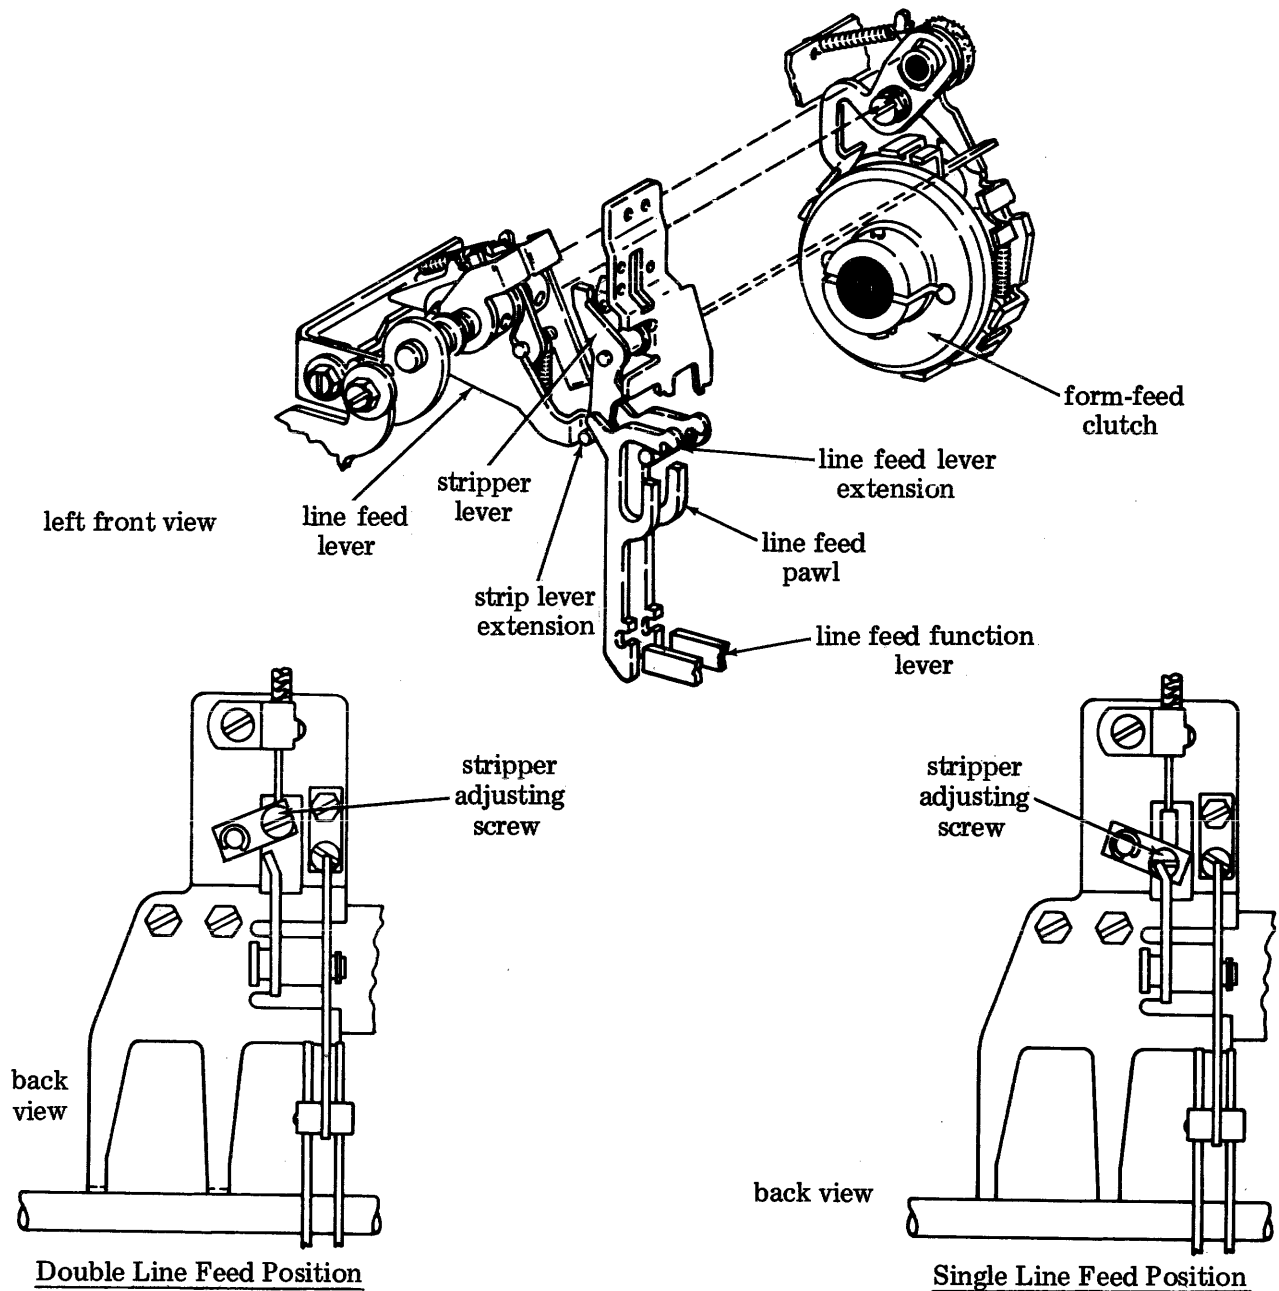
Form-Feed Mechanism (Sprocket Feed)
